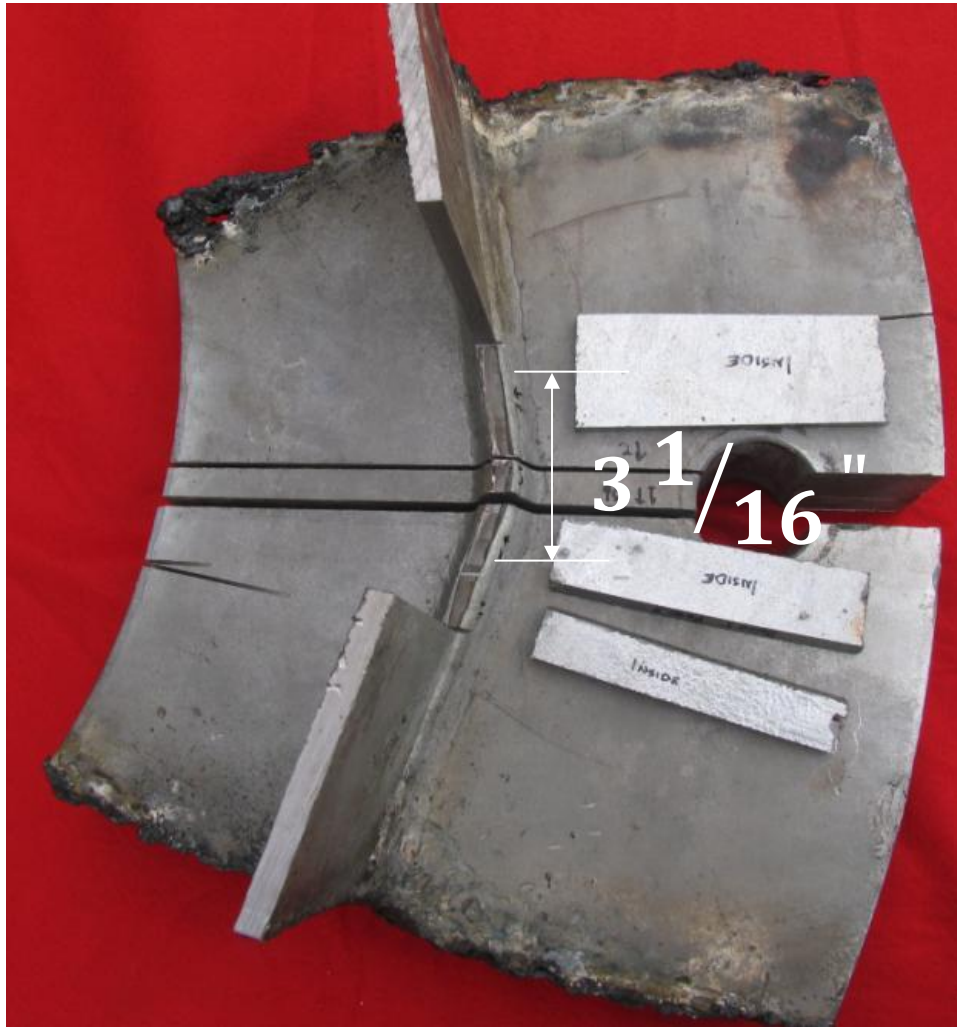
View of Bend 5 after Sectioning. Length of Observed Initial Crack is Labeled
